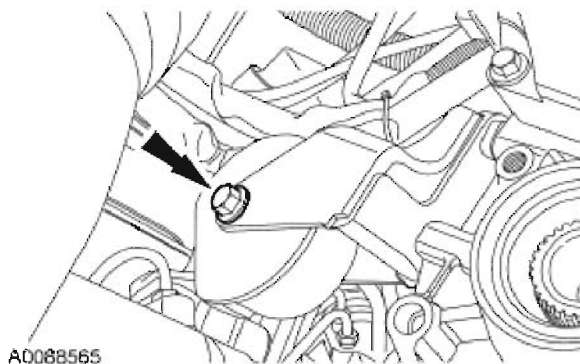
Securing Engine To Lift Table Using Special Tool (014-0001, 014-00765)
